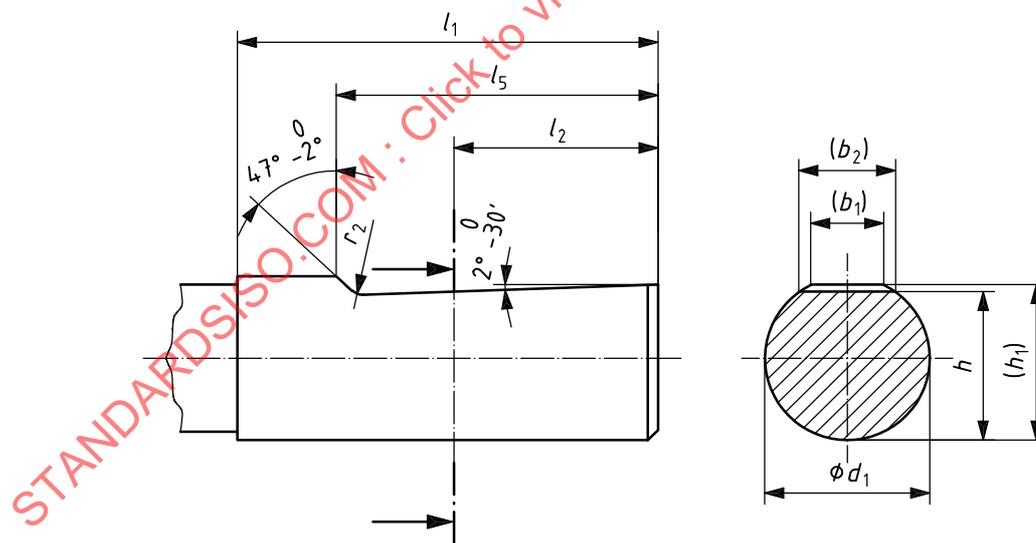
WN form — Flatted cylindrical shanks with inclined clamping surface
